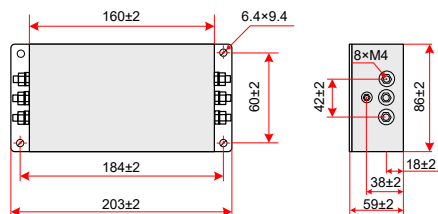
Dimensions of Jianli series filter DL-5EBK5 (unit: mm)
